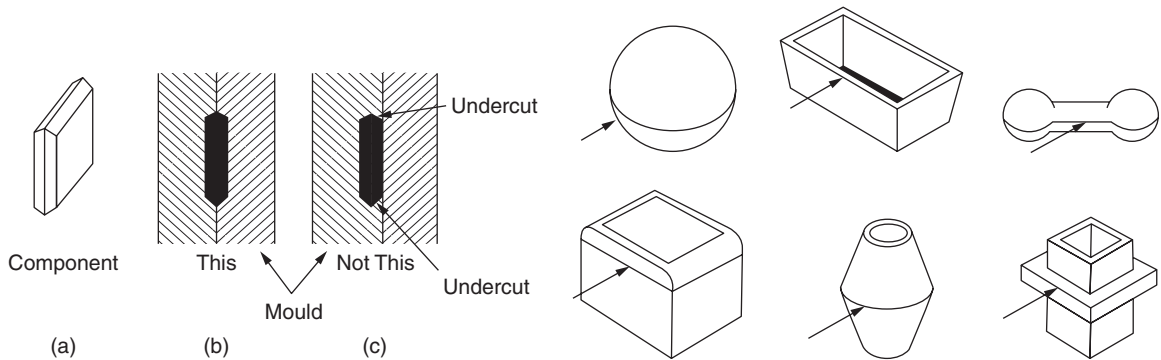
(a) Parting line of moulding and parting surface of mould.
